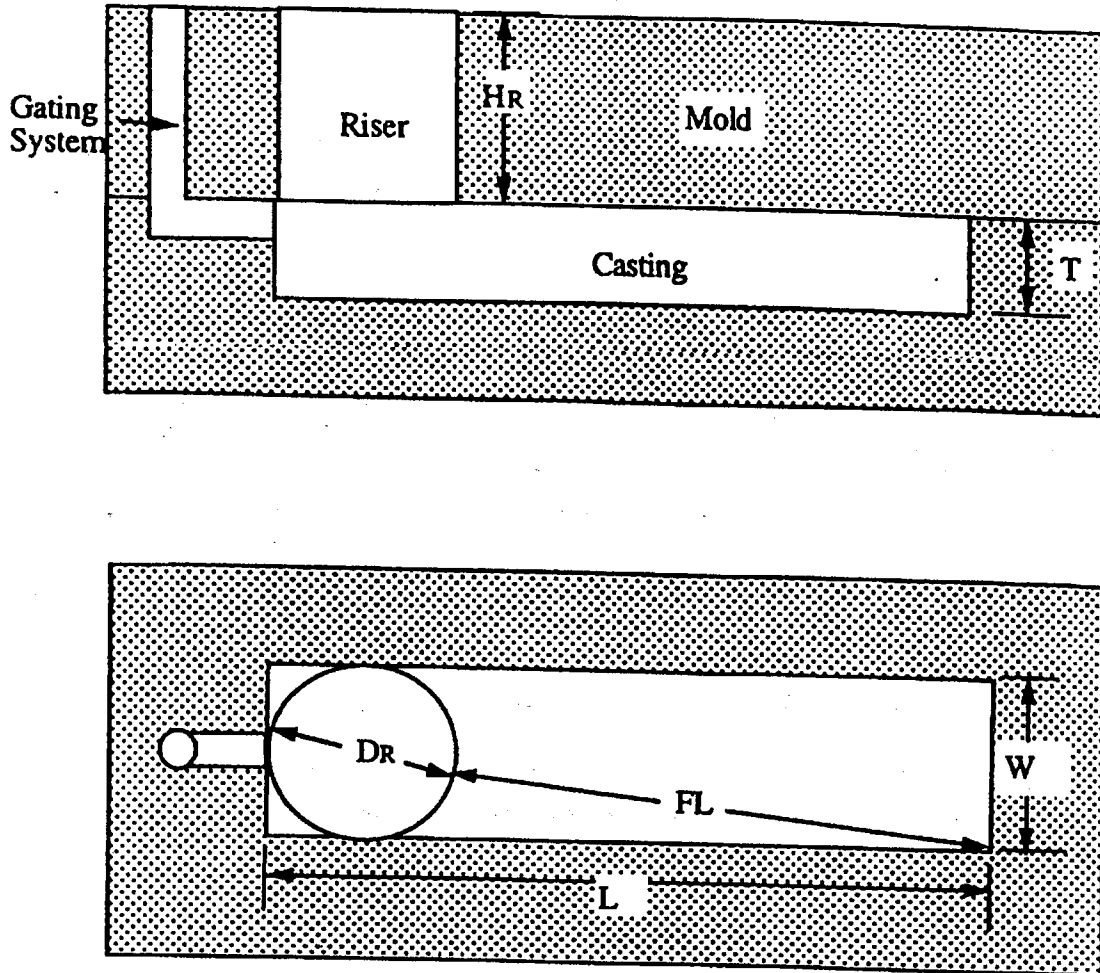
General configuration and nomenclature for the horizontal plate casting trials
